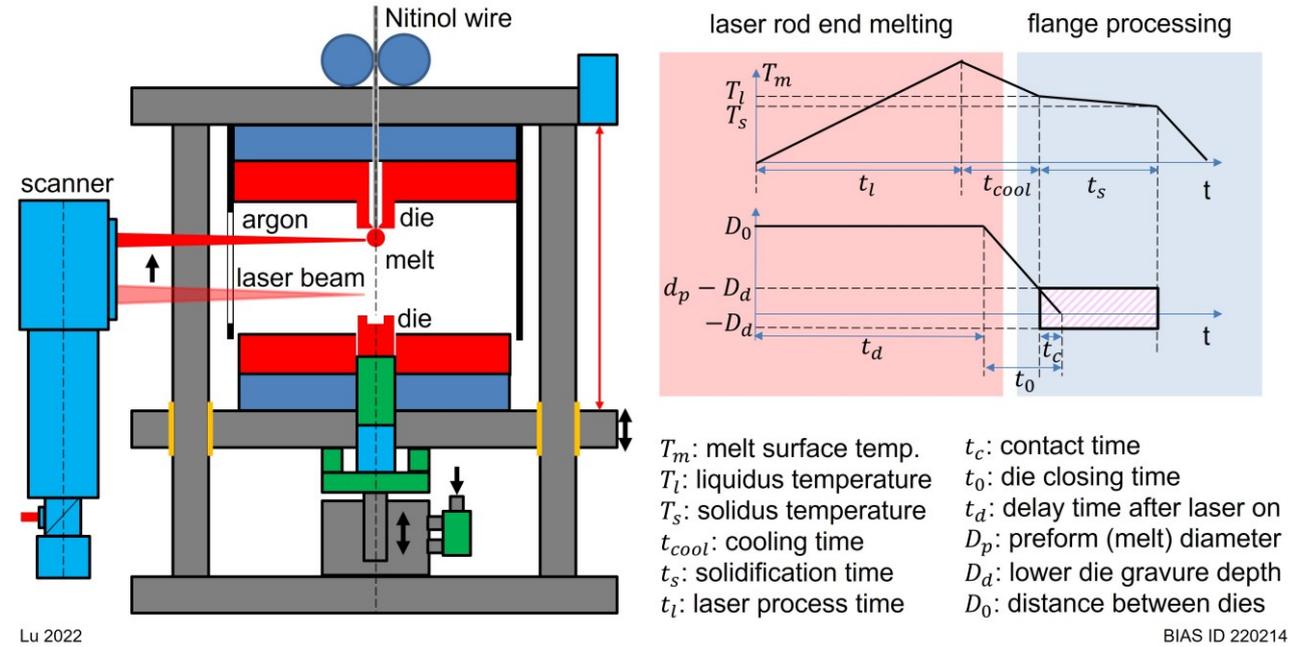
Experimental setup for laser rod end melting and flange processing of Nitinol wire and their working sequence
